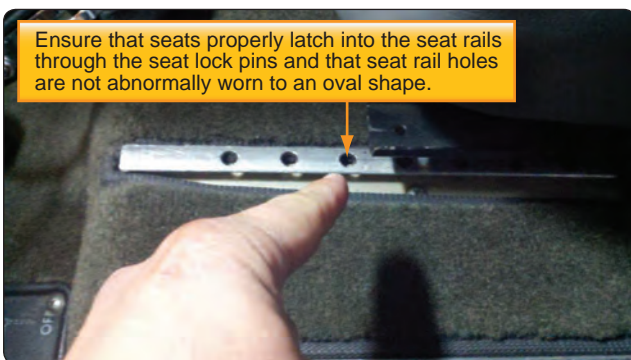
Seats should be inspected to ensure that they are properly latched into the seat rails and checked for damage.
